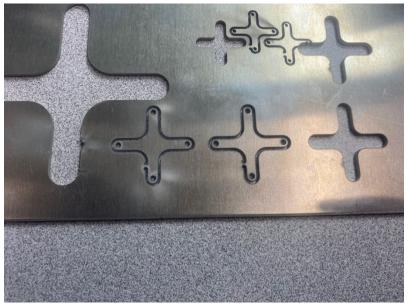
X-bracket cut out of 6061 Aluminum sheet metal with WaterJet in Mustang 60 Machine shop
